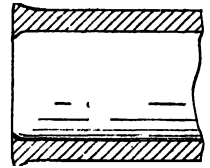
Burring on end of pipe after use of three-wheel cutter. Note the consequent reduction of internal pipe-diameter.
